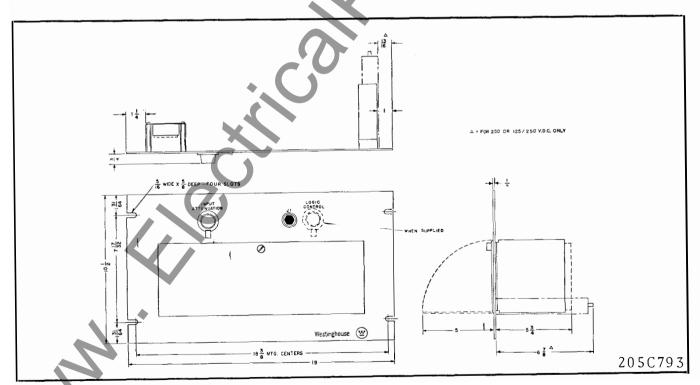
Outline and Drilling Plan for the Type TCF Receiver Assembly.
